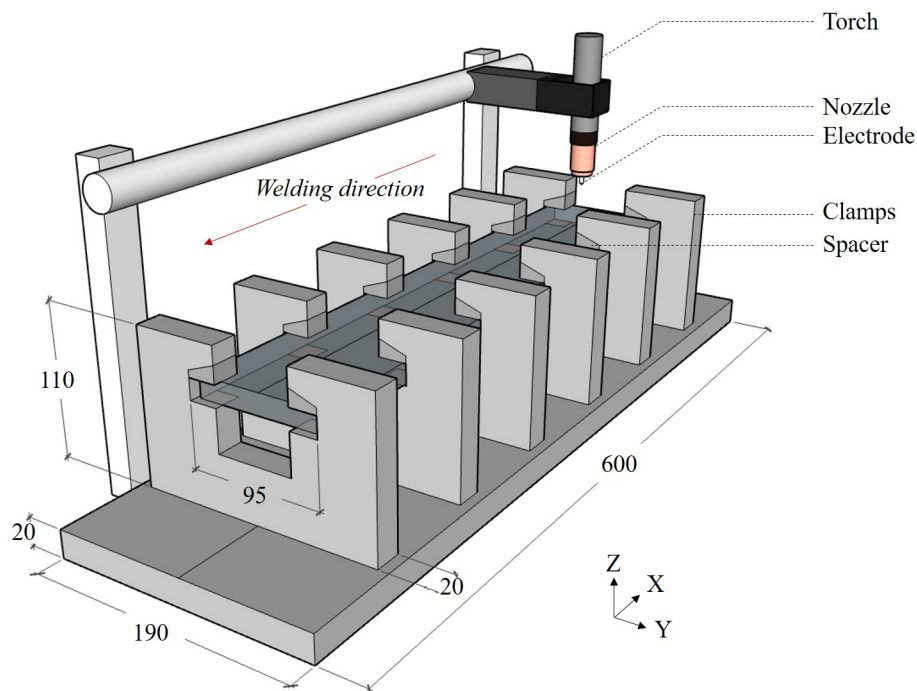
Experimental setup used for the welding of a 316L(N) steel plate restrained by a clamping system made of S235 steel. Dimensions are given in mm.
